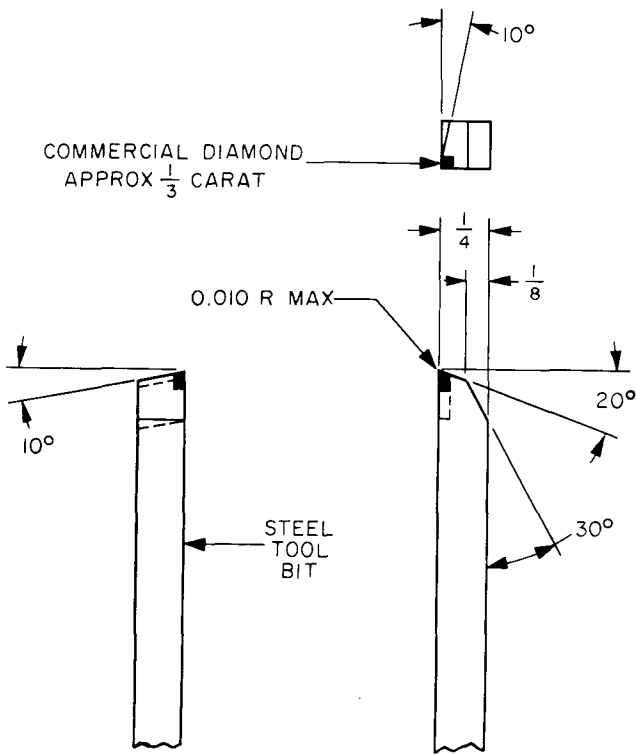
Fabrication of Diamond-tipped Cutting Tool
